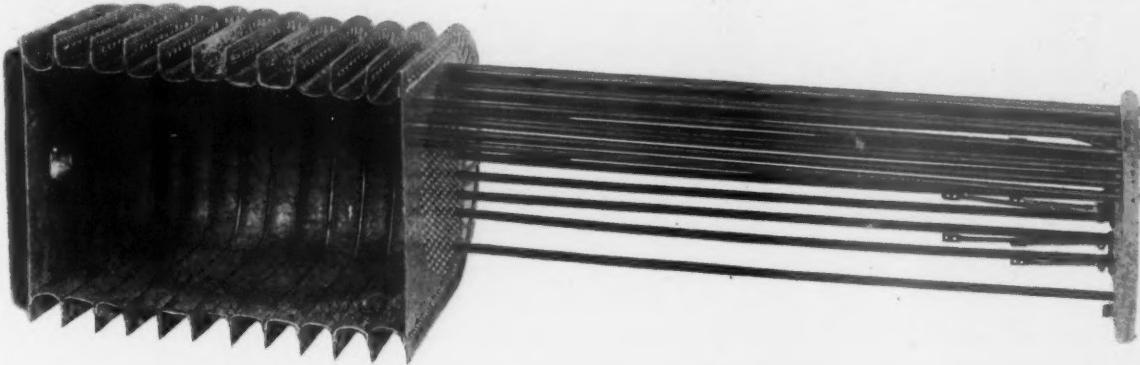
BOTTOM VIEW OF FIREBOX WITHOUT MUDRING OR OUTSIDE SHEETS.
